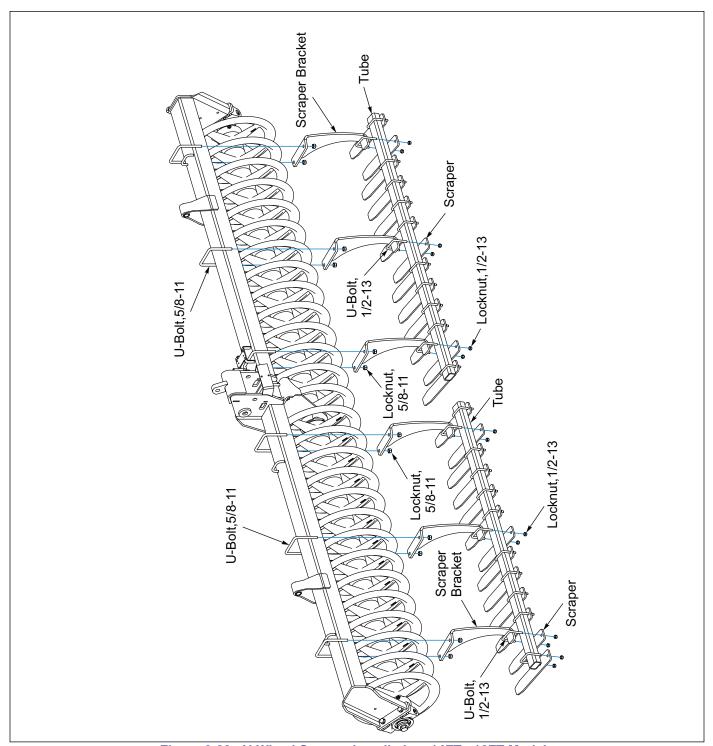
V-Wheel Scraper Installation, 14FT - 16FT Models
